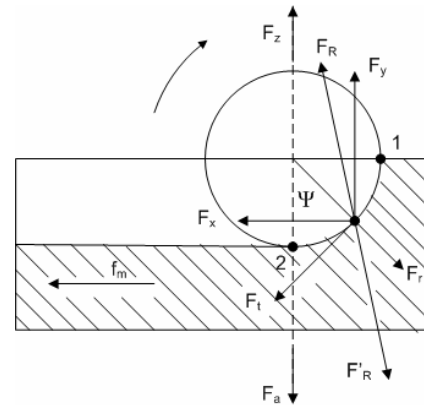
Cutting Force Components Acting on One Tooth of an End Mill Cutter (Down Milling).
